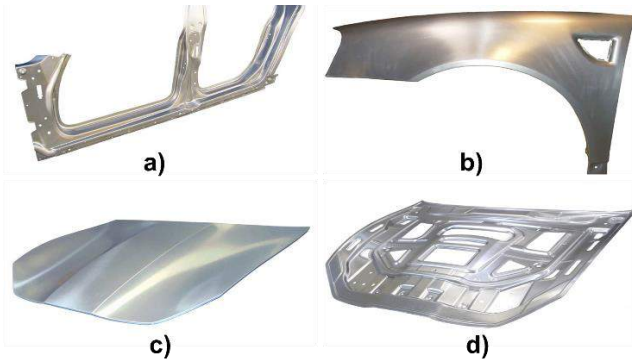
Sheet metal forming applications in automotive industry, a) body side lower, b) front fender, c) hood outer hydroformed parts, d) hood inner [6]
